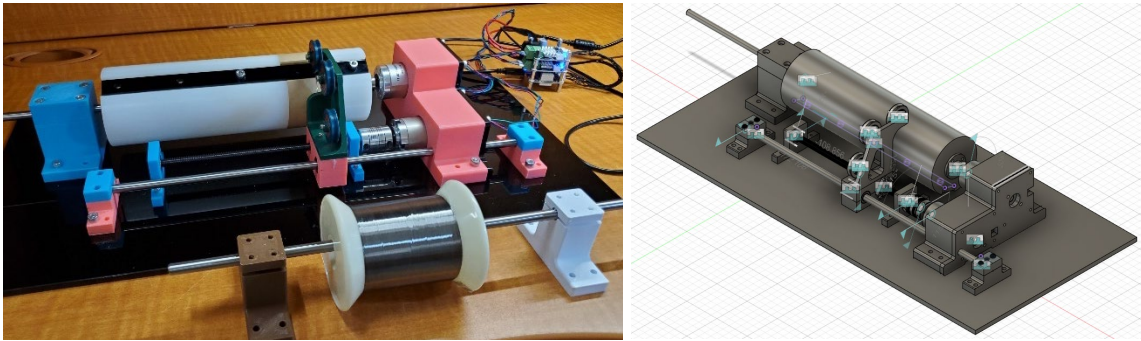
[Left] Prototype fiber winder, with a 76.2 mm winding drum/roller, and theoretical 1.085 nm minimum winding separation step size. [Right] CAD model of the winding setup.
